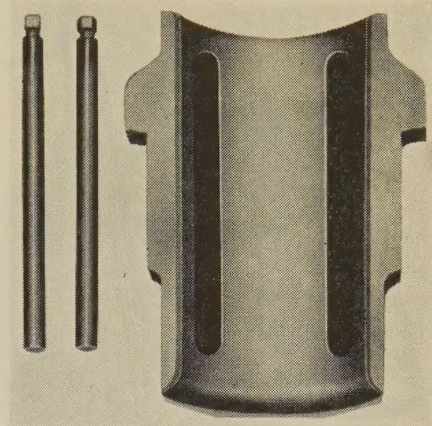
SATCO-LINED "TWINPLEX" ALARM JOURNAL BEARING
